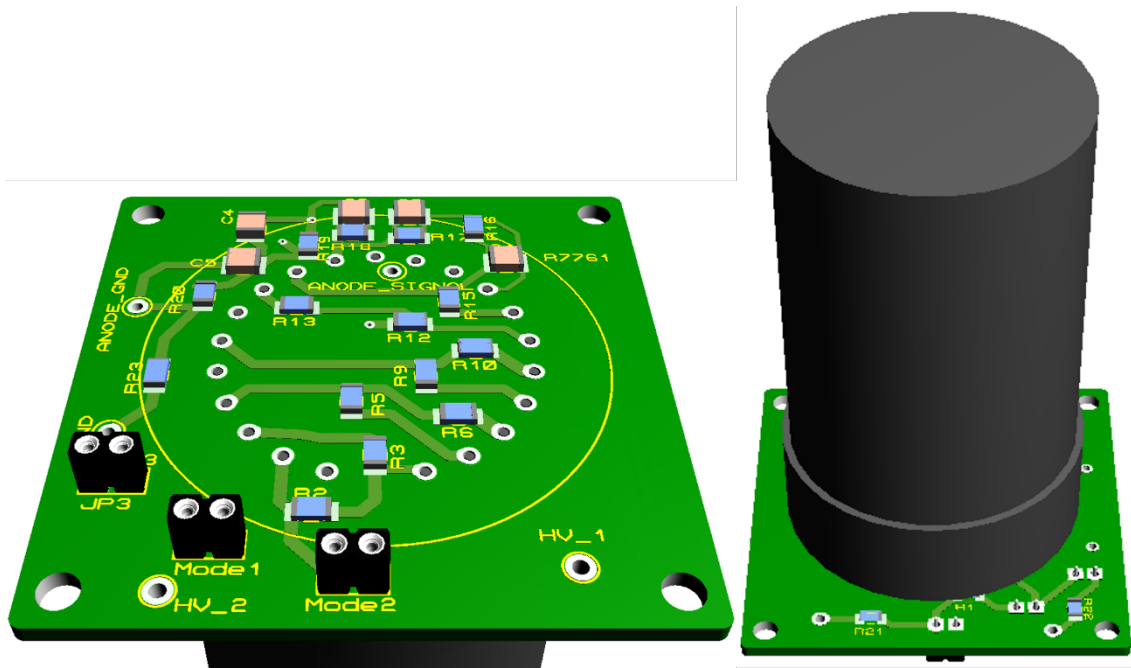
3D view of top side (left) and bottom side (right) for manual controlled R7761 type Photomultiplier tube.
